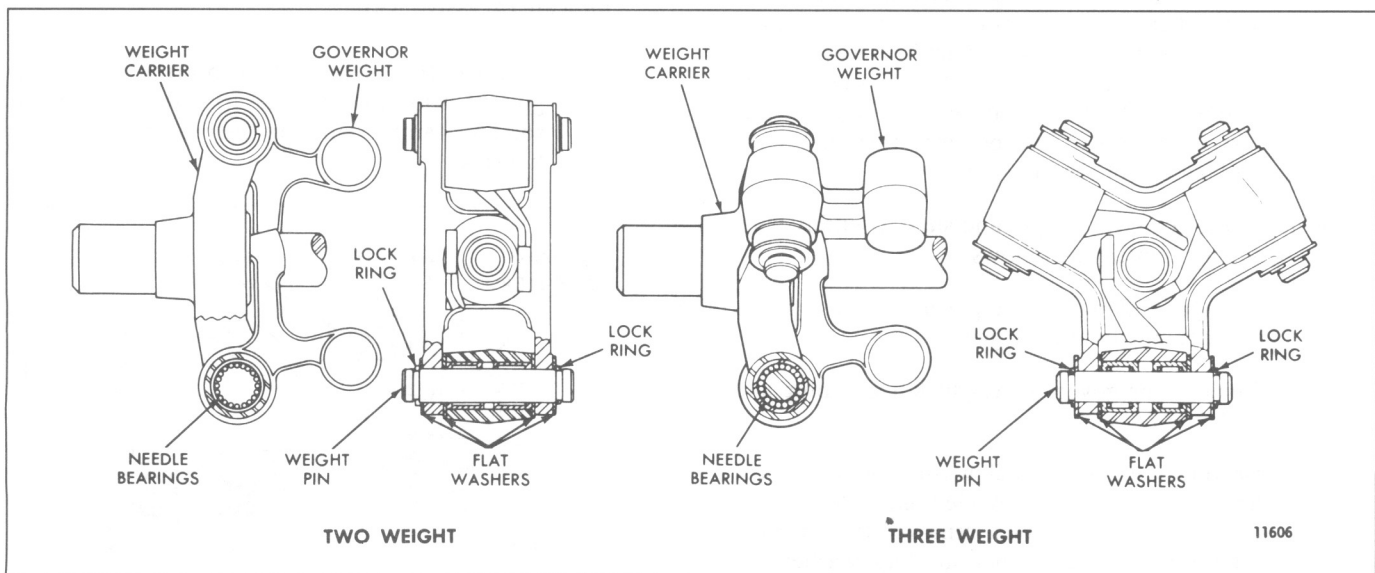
Cross Section of Governor Weight Assemblies (Turbocharged Engines)
